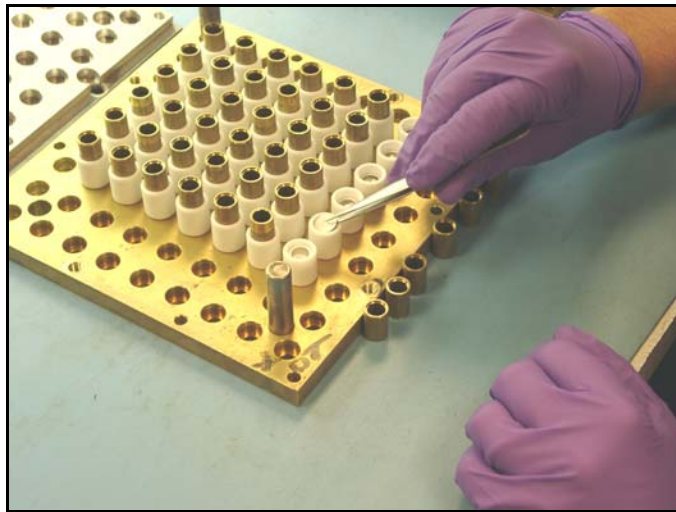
Epoxy coated piezoceramic is placed into assembly fixture
